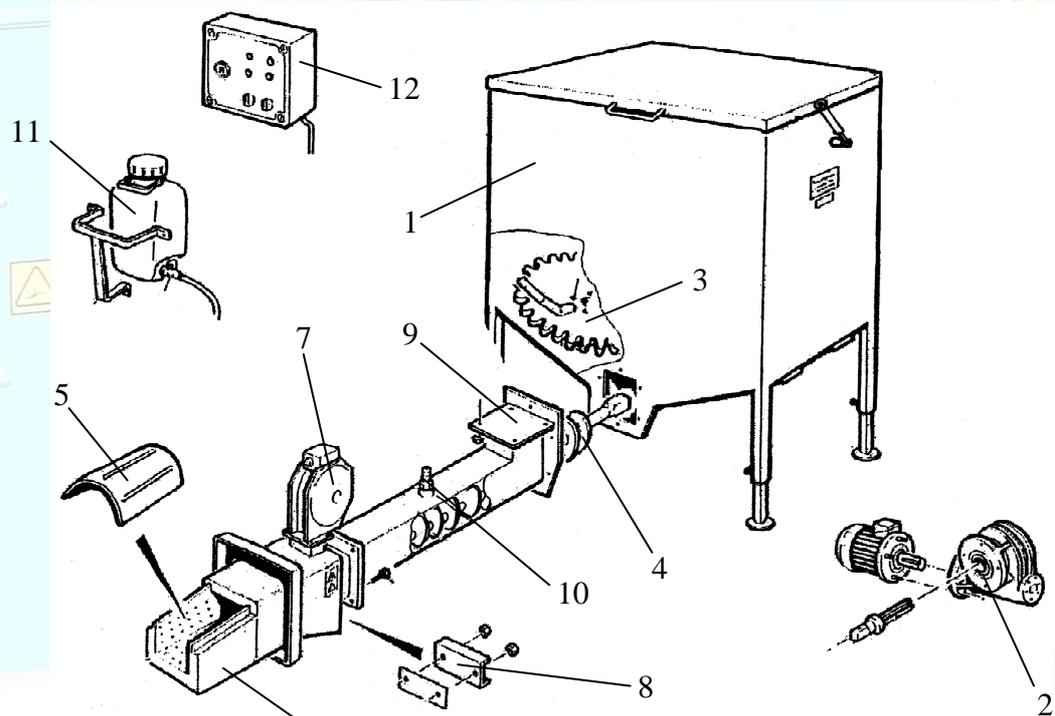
Moderator-type boiler (version designed for use in ABB set) – main parts.
